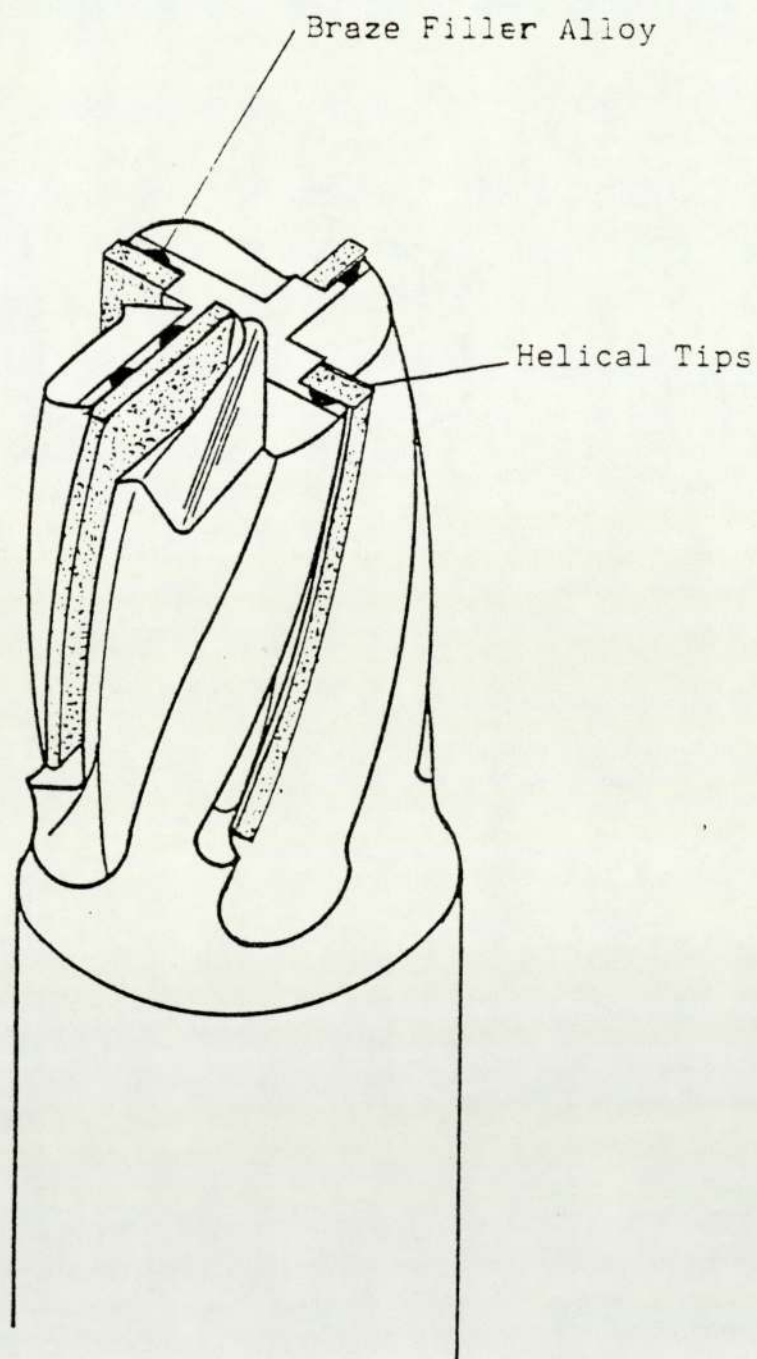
ASSEMBLED VIEW OF MILLING CUTTER WITH
